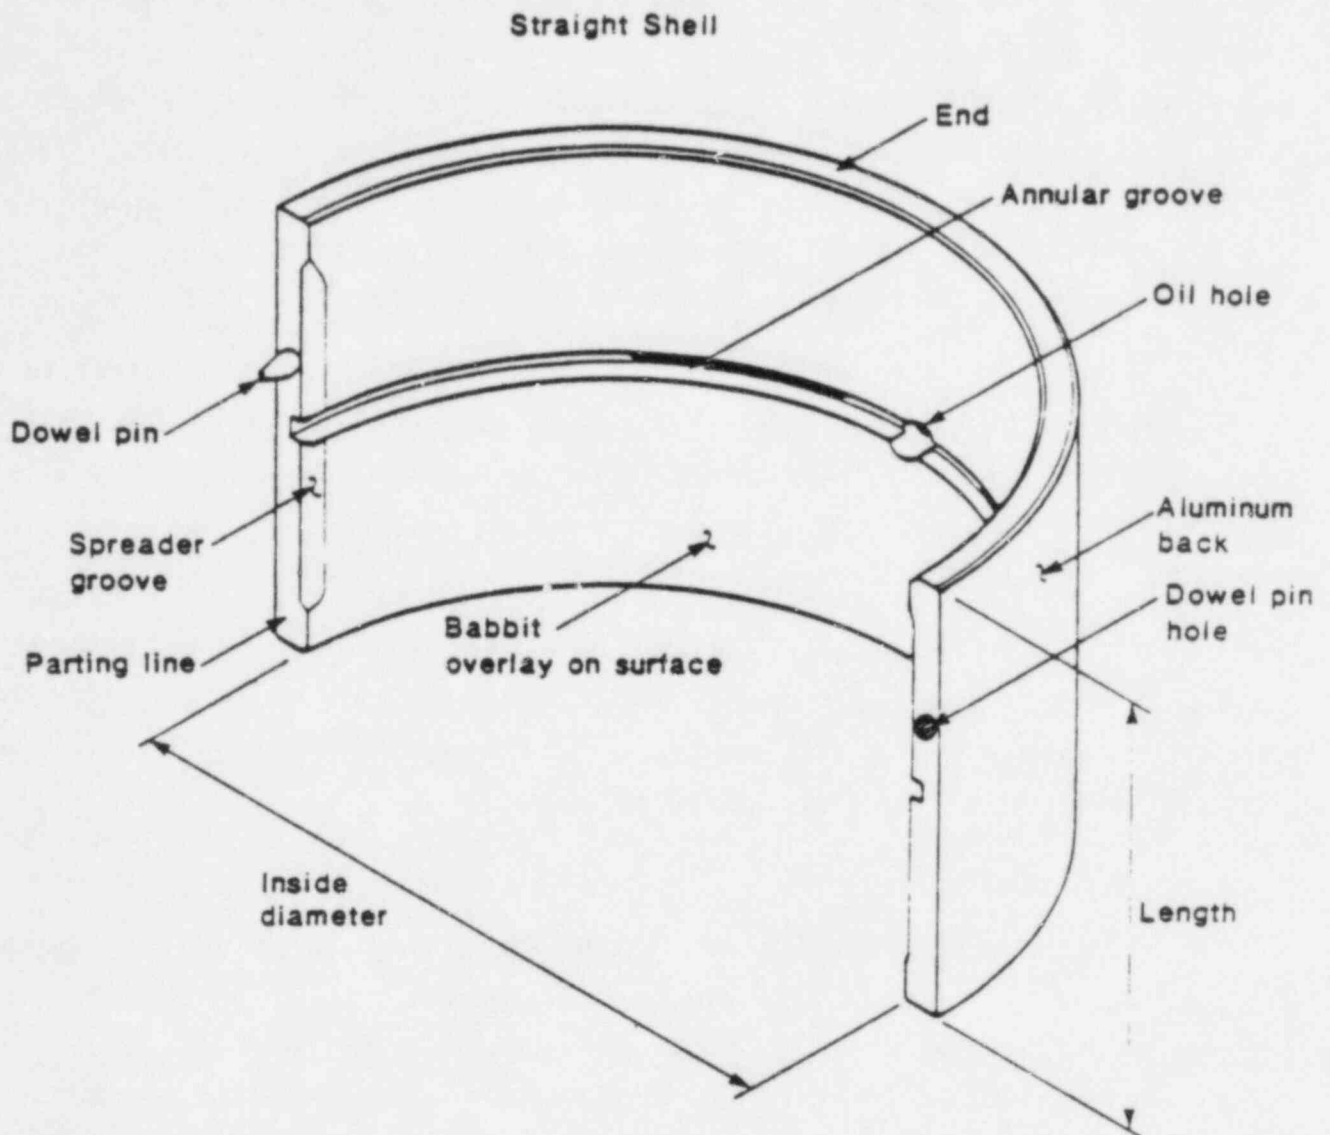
Connecting rod bearing design and nomenclature (schematic).
